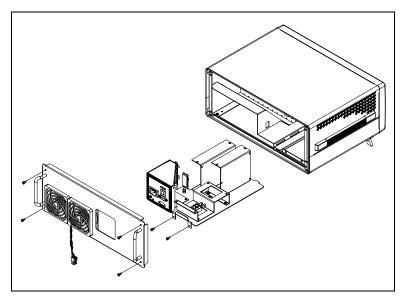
Rear of Chassis with Rear Panel and Power Supply Removed
